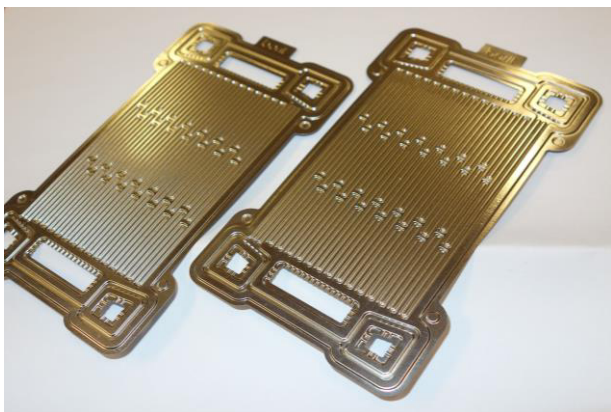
Example of metallic bipolar plates from supplier showing two bipolar plates welded together, incorporating liquid cooling channels in between the plates
